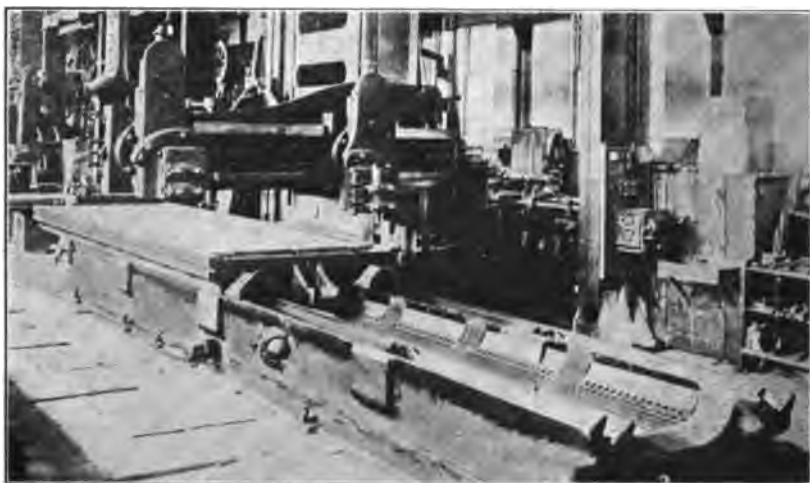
Large planer equipped with a neat and substantial bed plate filler.
